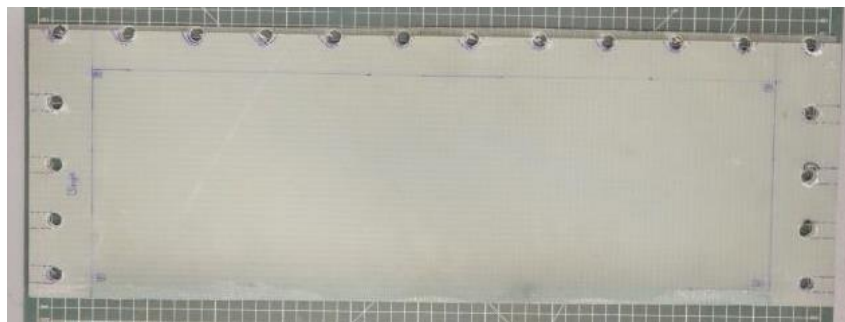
Drilled bonded plate with delimited dimensioning.
